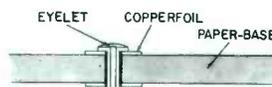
Eyelets Connecting Pattern on Both Sides of Board.
